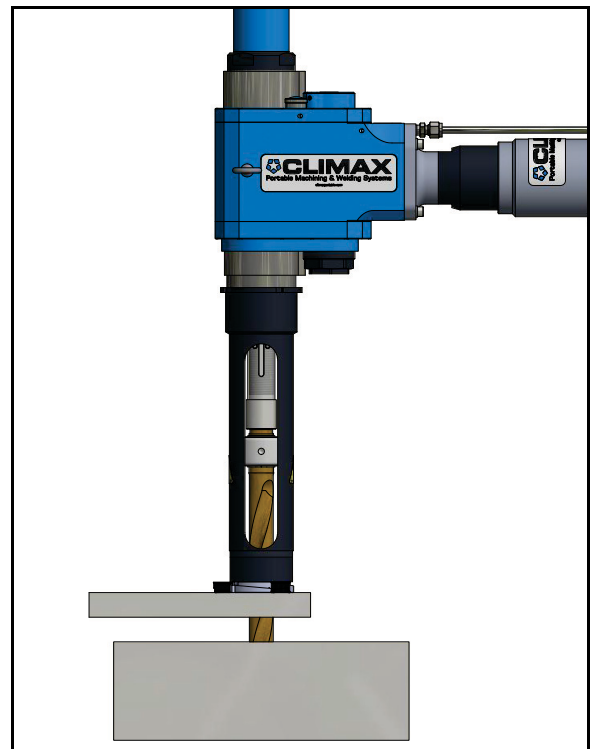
DRILL, TEMPLATE, AND WORKPIECE
